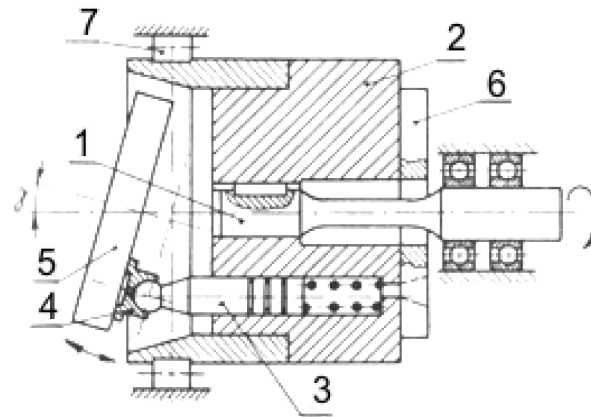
Simplified design diagram of an axial piston pump with a swashplate: 1—shaft, 2—rotor, 3—piston, 4—sliding shoe, 5—swashplate, 6—valve plate, 7—bearing [28].
